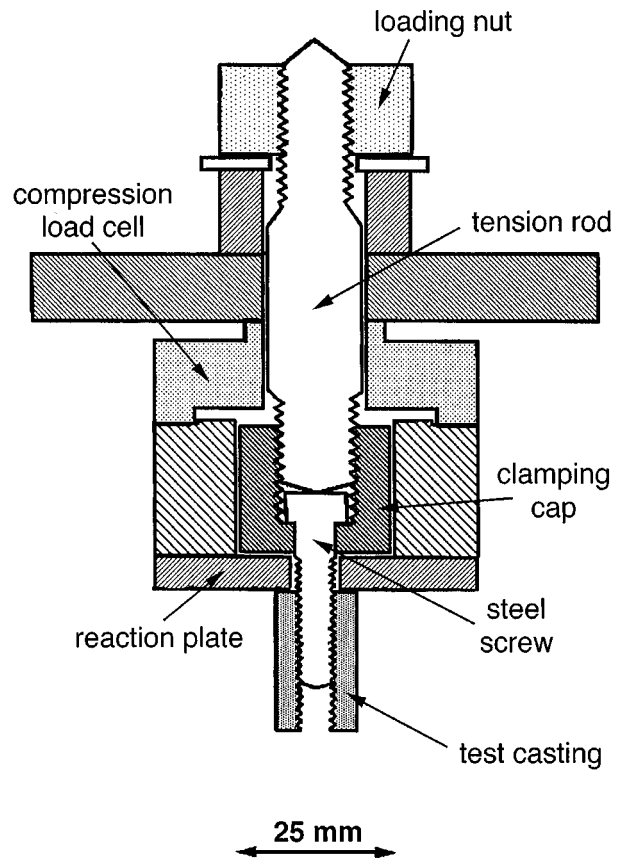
Representation of the arrangement for conducting load-relaxation tests on simple hollow cylindrical specimens.
